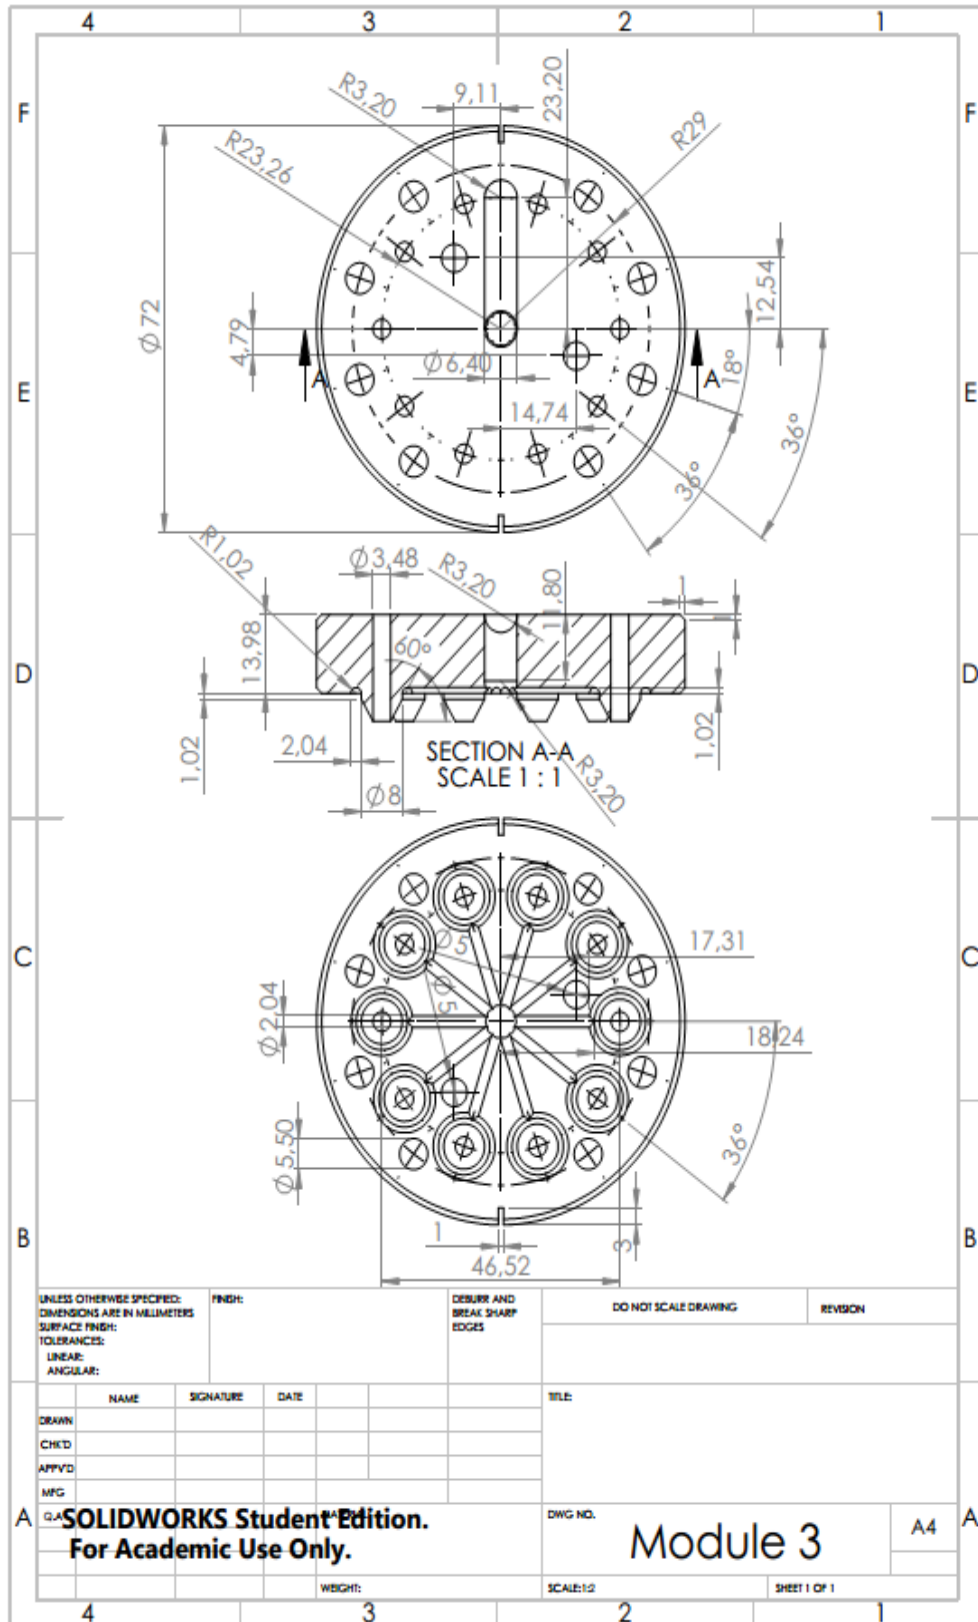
2D drawing of the module 3 of the filament coextrusion die.
